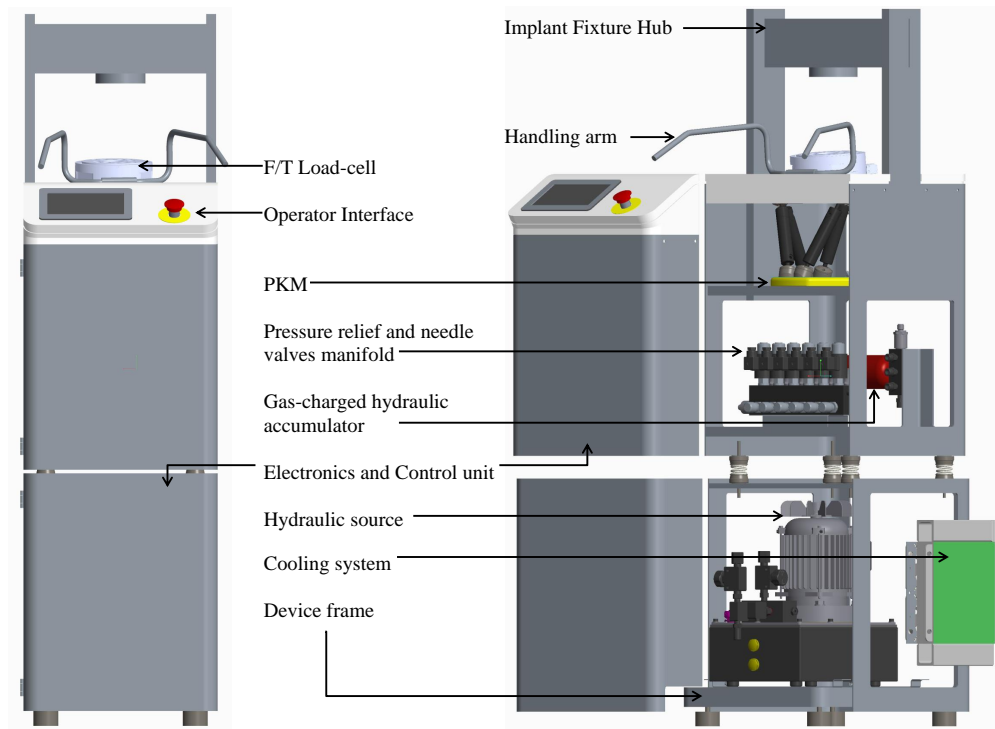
The design of the DIFERM chewing simulator machine.
